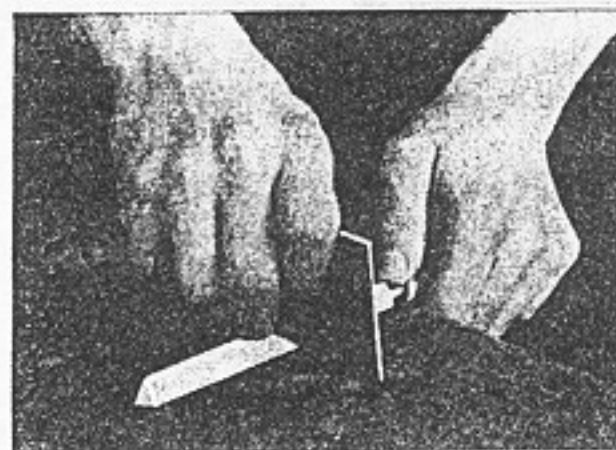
Turning edges of hand scraper, burnisher on bench.
